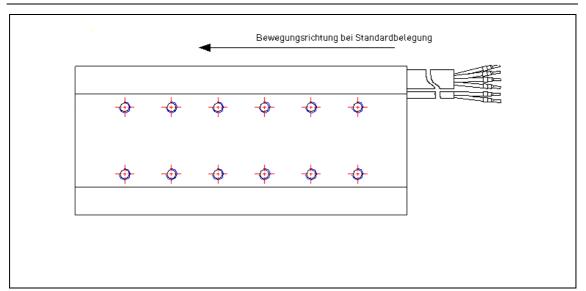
Direction of movement with the standard assignment: cable outlet is "behind"
